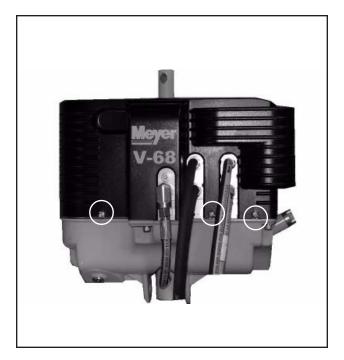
Remove three phillips head screws from the front of cover.
